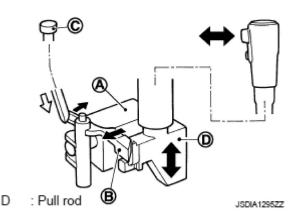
Identifying Shift Lock Solenoid, Lock Lever, Pull Rod, And Shift Lock Release Button Courtesy of NISSAN MOTOR CO., U.S.A.
